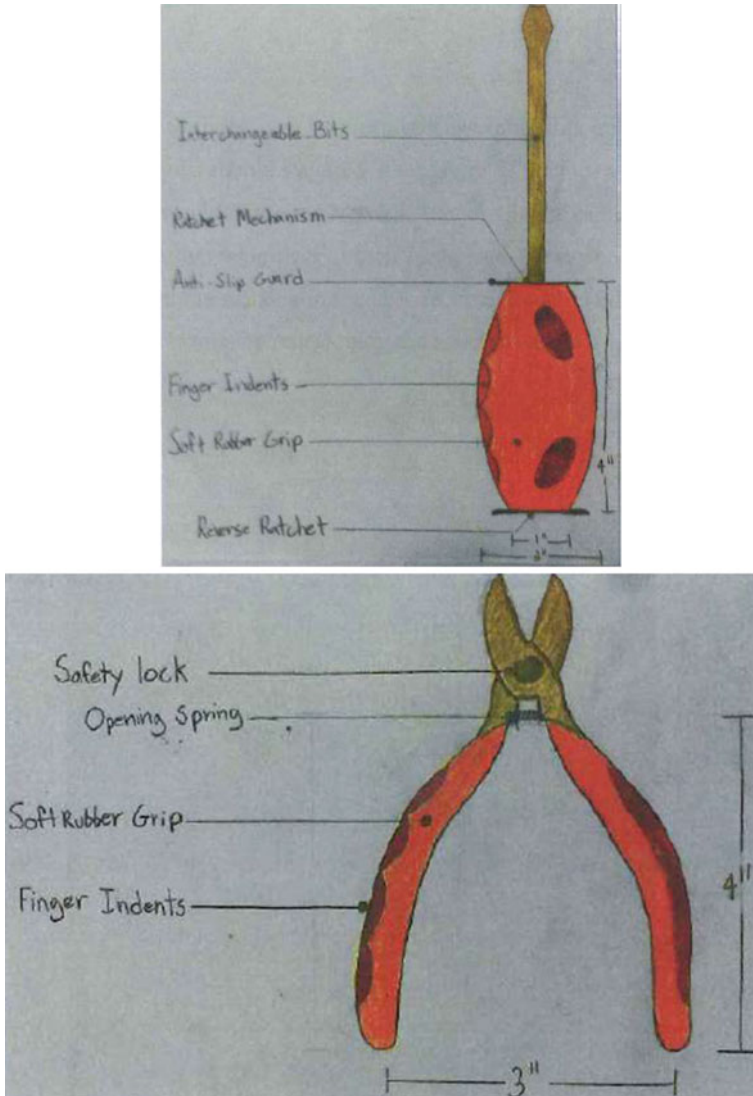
Set 5 screw driver redesign wire cutter redesign
